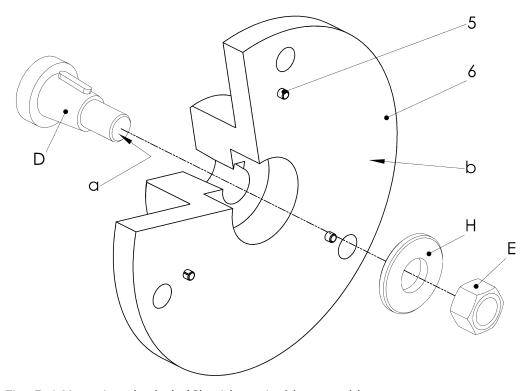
Mounting the hub (6) with conical bore and keyway
